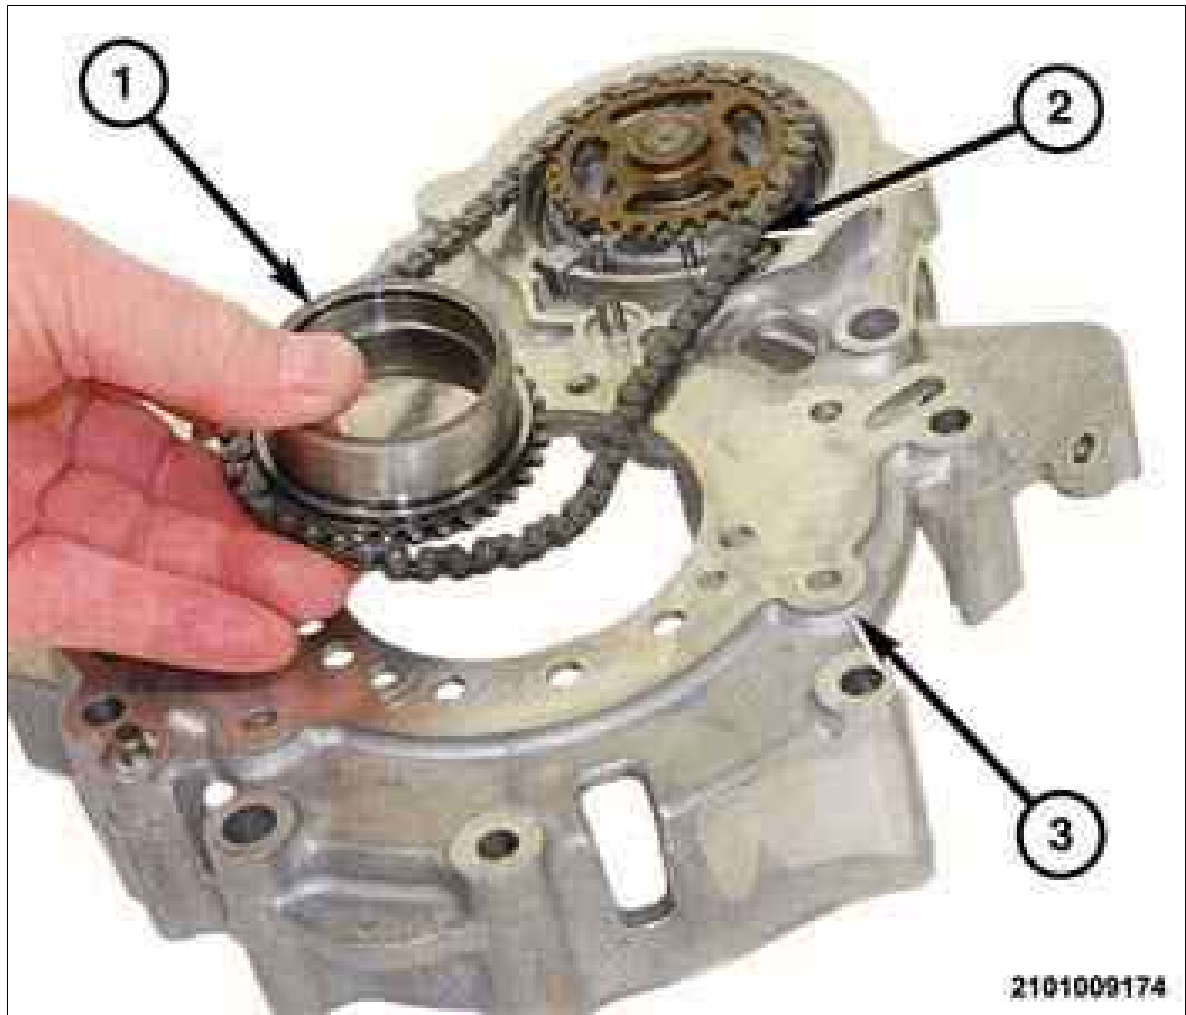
Oil Pump Drive Chain & Oil Pump Driven Sprocket
